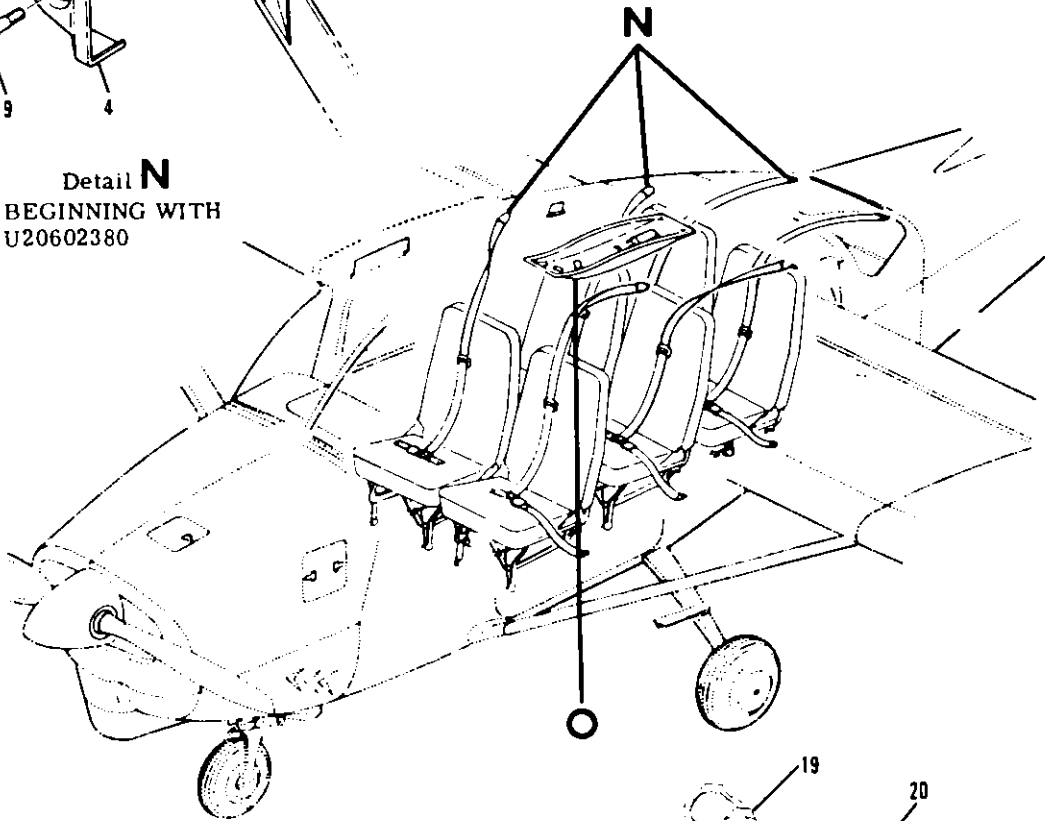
Seat Belt and Shoulder Harness Installation (Sheet 2 of 3)
